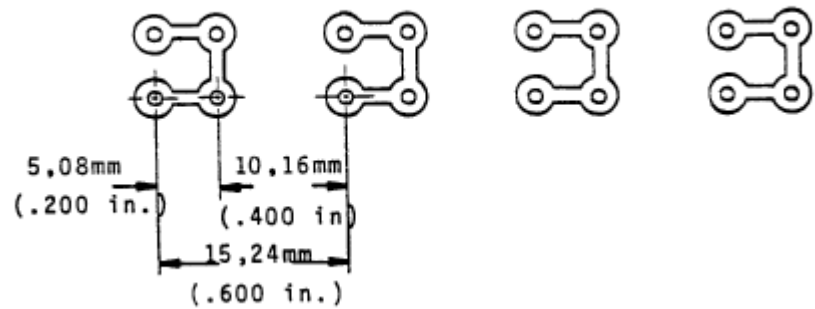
PRINTED WIRING BOARD (TEST)
